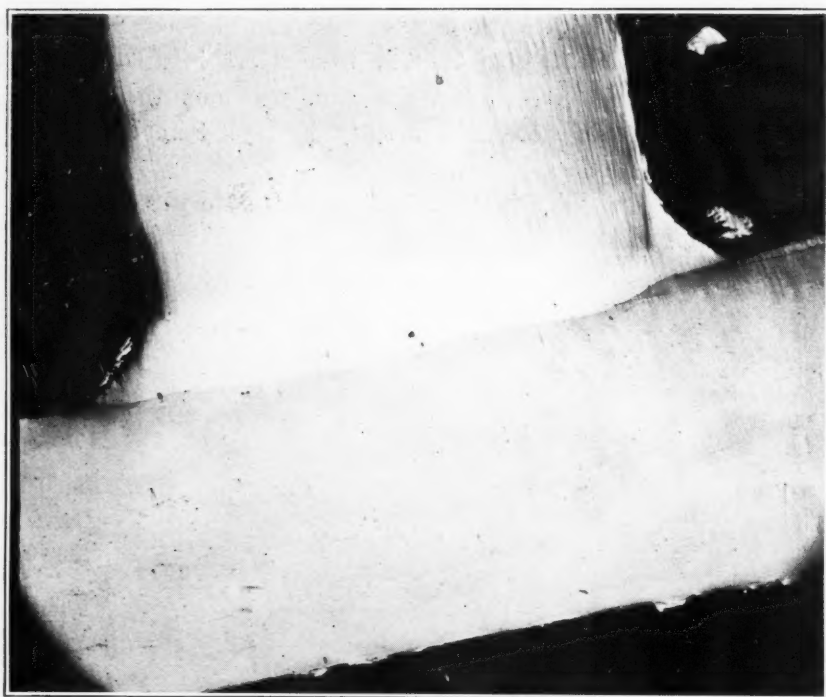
Dr. Ellis. 14K solder. High fusing wire. Joint very sound.
